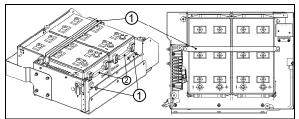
BATTERY FIXING CLAMPS AND LIFTING HANDLES
